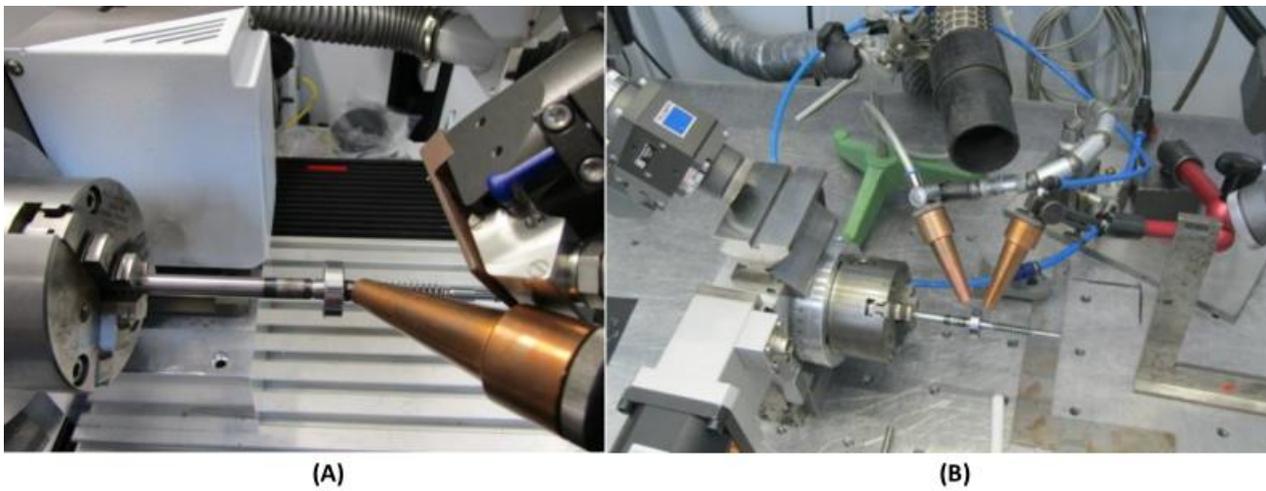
Welding setup and clamping situation, (A) parameter 1 and 4, (B) parameter 2 and 3 [7]
